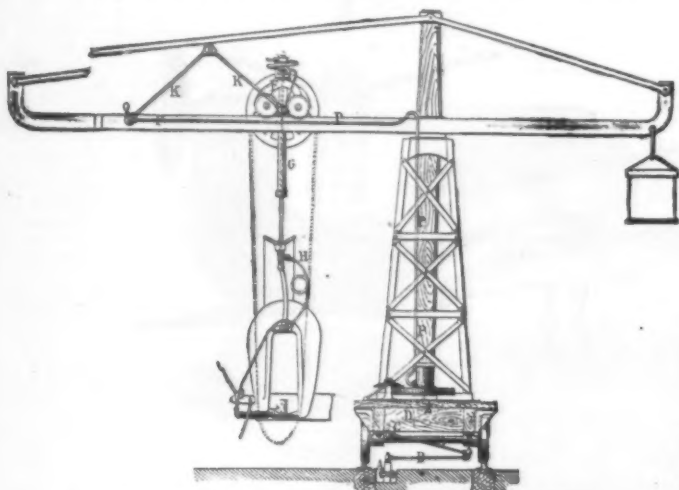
MOVABLE CRANE CARRYING A RIVETER.
